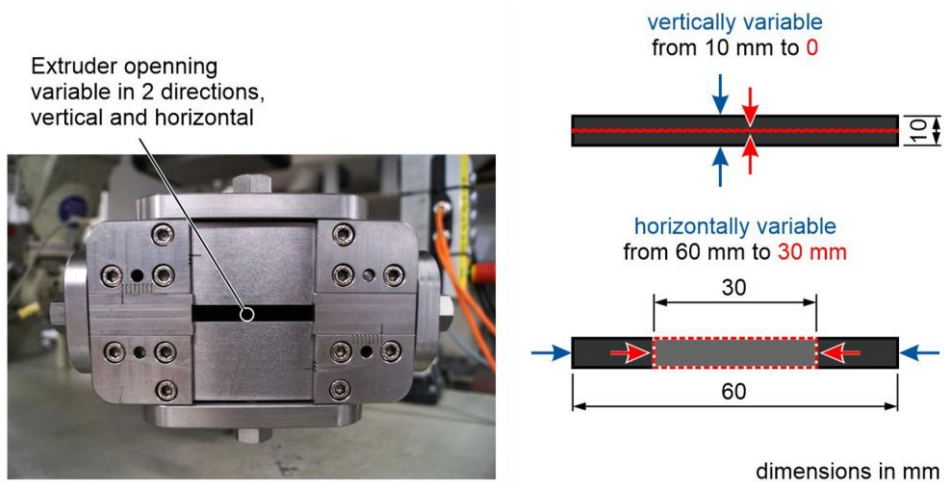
(a) Close-up of the adjustable mouthpiece and (b) the maximum and minimum possible cross-sectional dimensions
